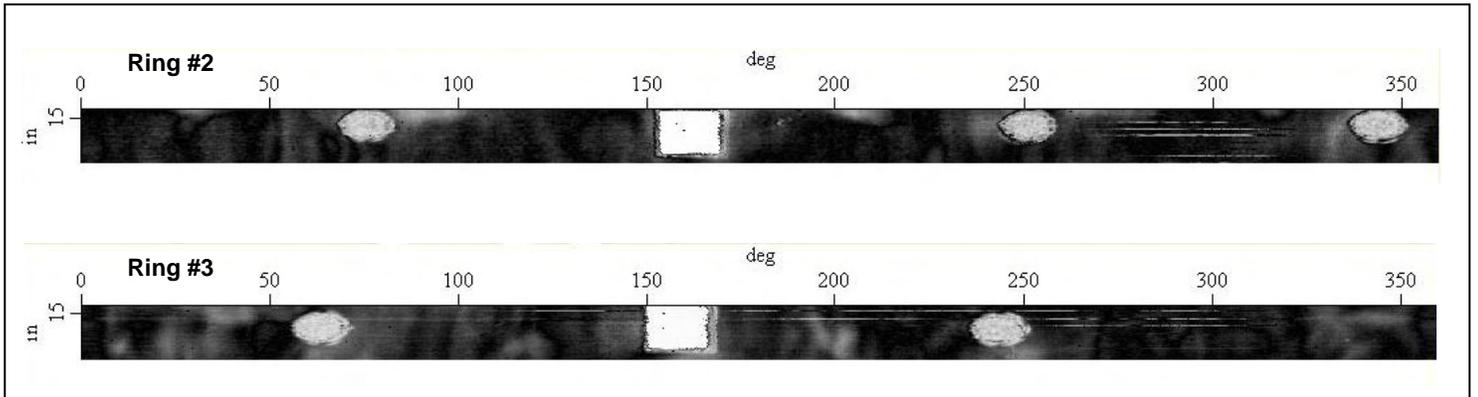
Image of GE ultrasonic inspection. Deposited material conformed to the acceptability criteria, indications and process interruptions were all outside of machined areas.
